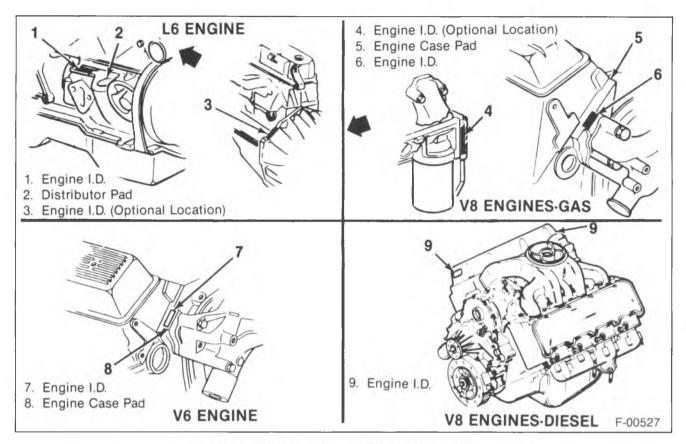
L V6 and all V8 Engine I.D. Locations
